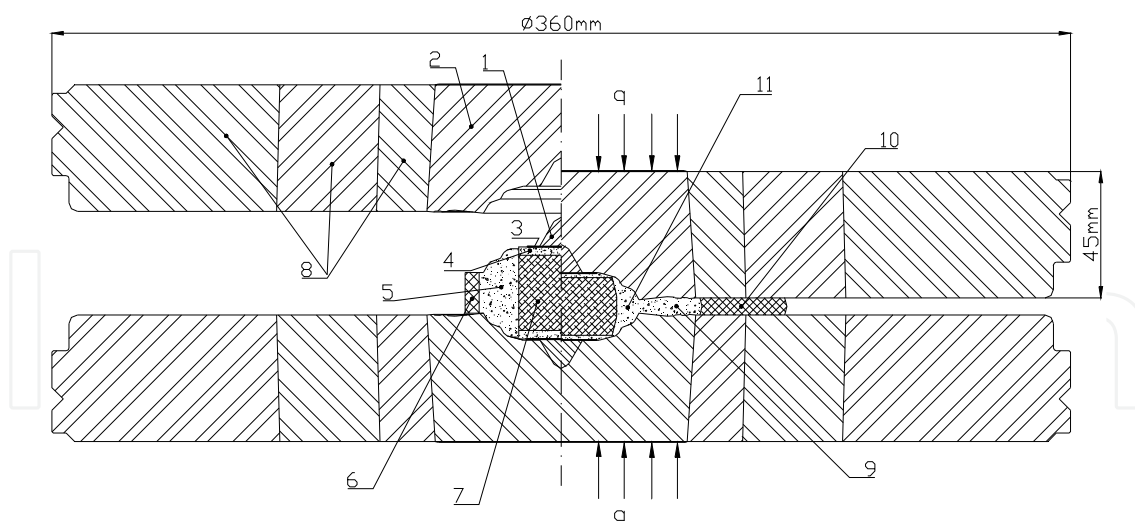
Scheme of the gasket inside the HPD. (1) protective molybdenum cone; (2) anvil; (3) graphite disc; (4) alumina disc; (5) gasket prior to loading; (6) PVC ring; (7) mixed powders; (8) multi-rings; (9) gasket under loading; (10) deformed PVC ring; (11) the most deformed region of the gasket; (q) applied load
